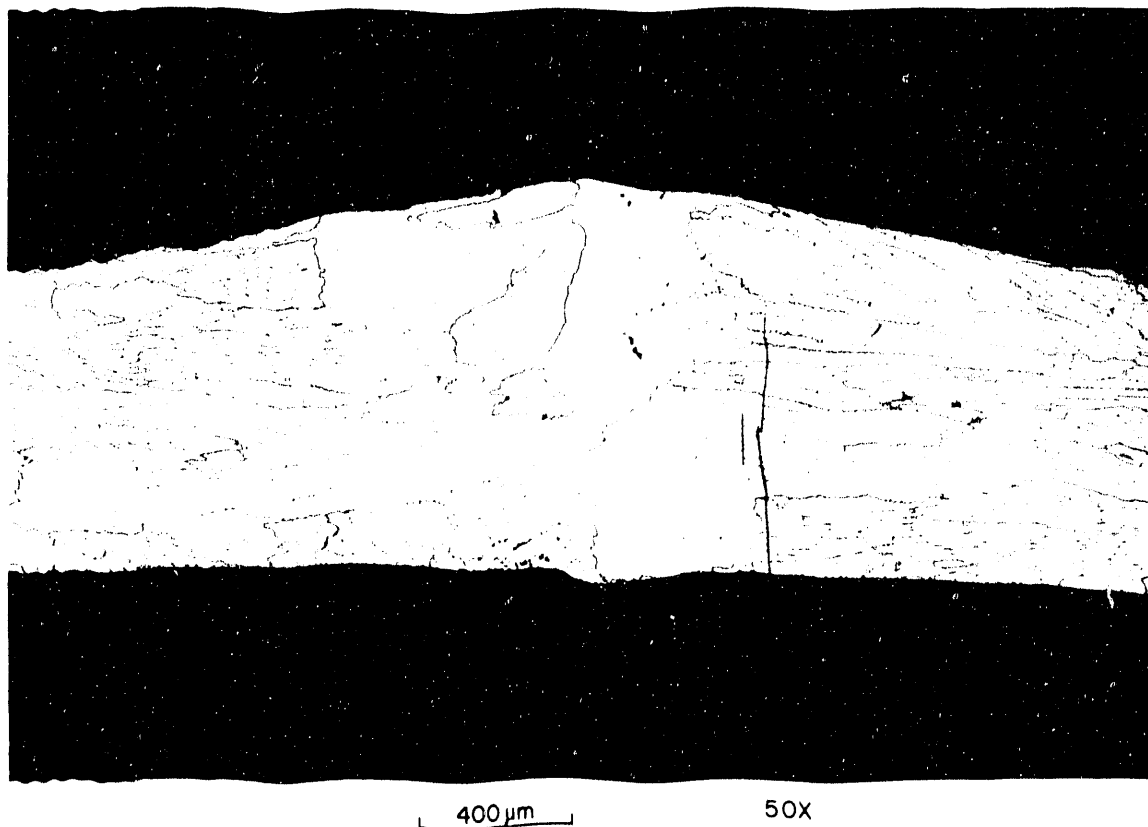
Transverse section of FA-167 weldment showing delayed cold-cracking.
